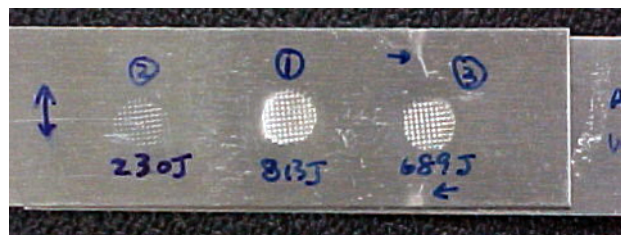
Interactions of multiple welds on the energy input level. All three welds were made with the same welding parameters: 2400 W, 70 psi, and a welding time set at 0.35 s. Weld ID = 4. Material: Al5754.
